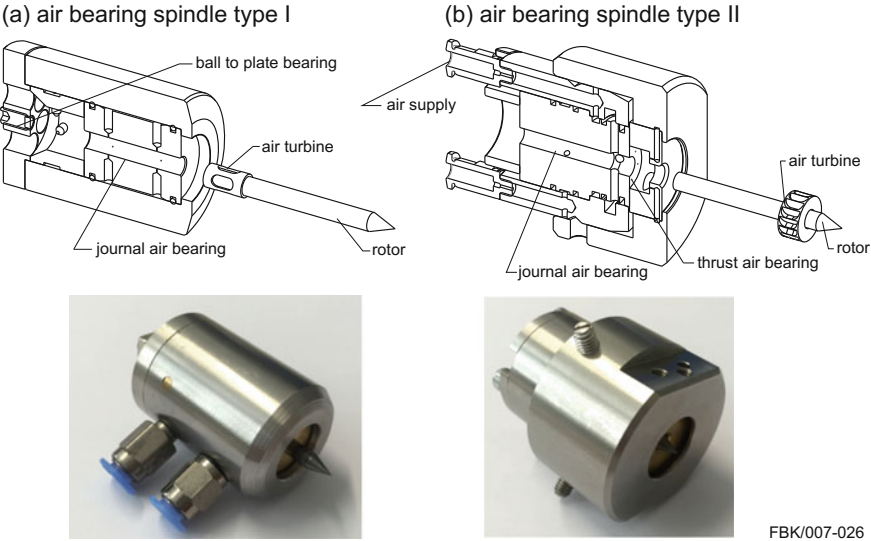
Schematic of the aerostatic spindles and build prototypes
